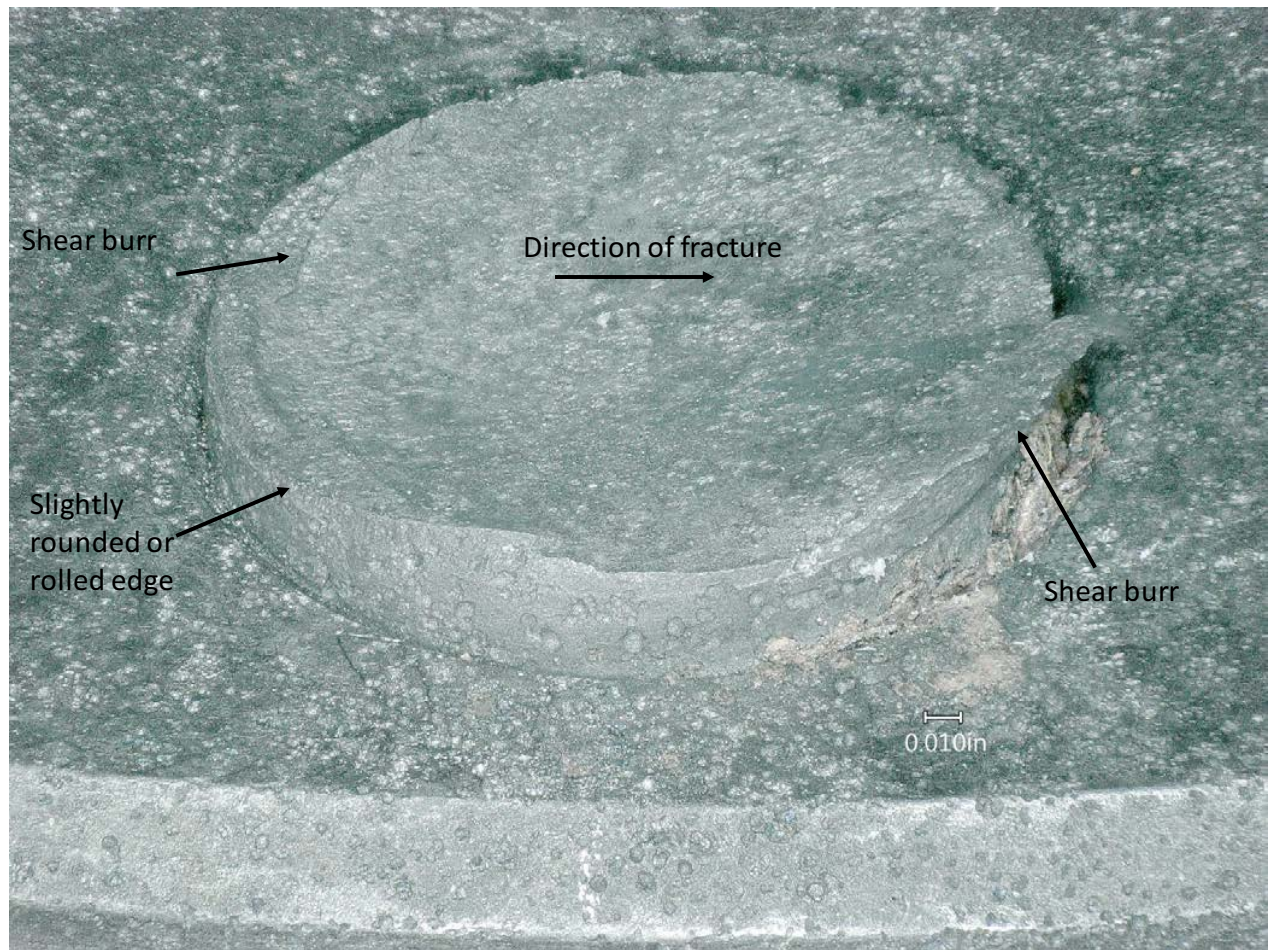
Close digital-microscope oblique-image of the fracture surface of the dowel pin. The surfaces have been cleaned with Evaporust and fine pits are evident. Key fracture features are identified.
